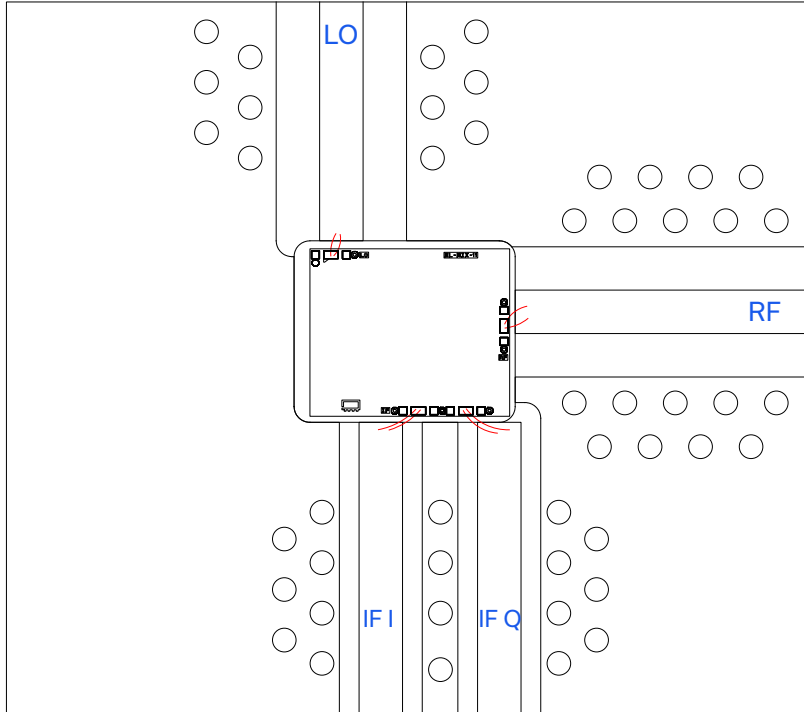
SMIQ-6243H-D+ Assembly Diagram
